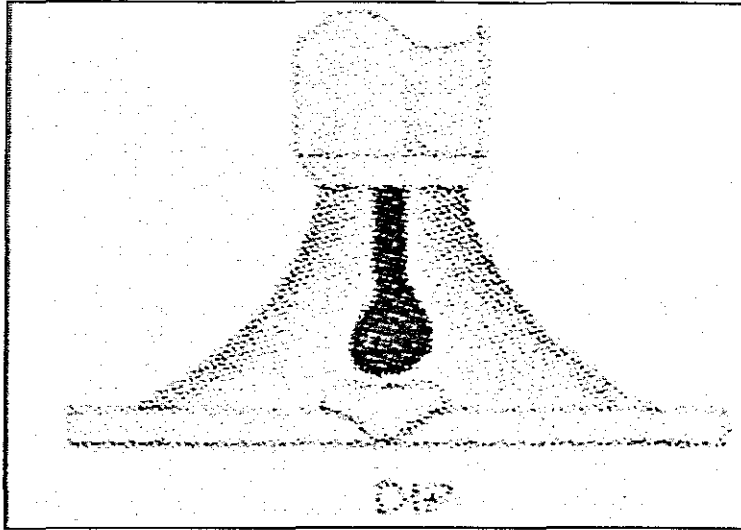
Short Circuit Transfer. Reprinted from Trends in Welding Technologies. [38]
